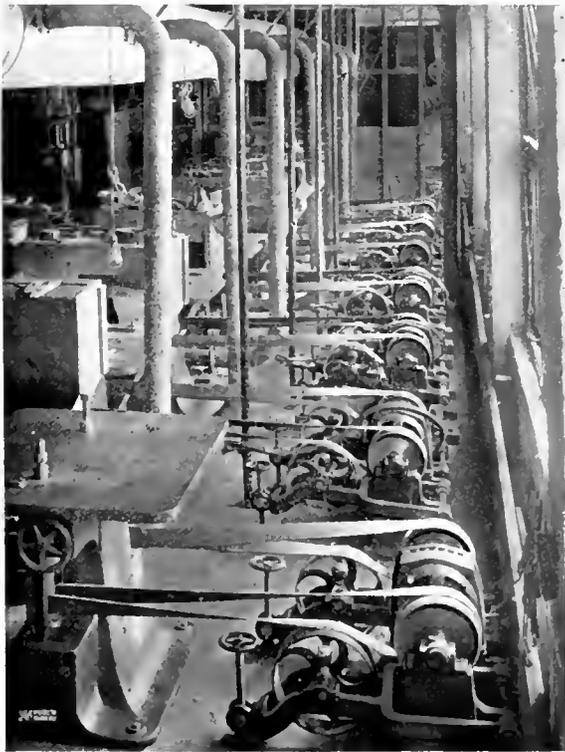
Seven Two-Spindle Shapers, Motor Driven Through Special Countershaft by 5 H.P. Induction Motors
